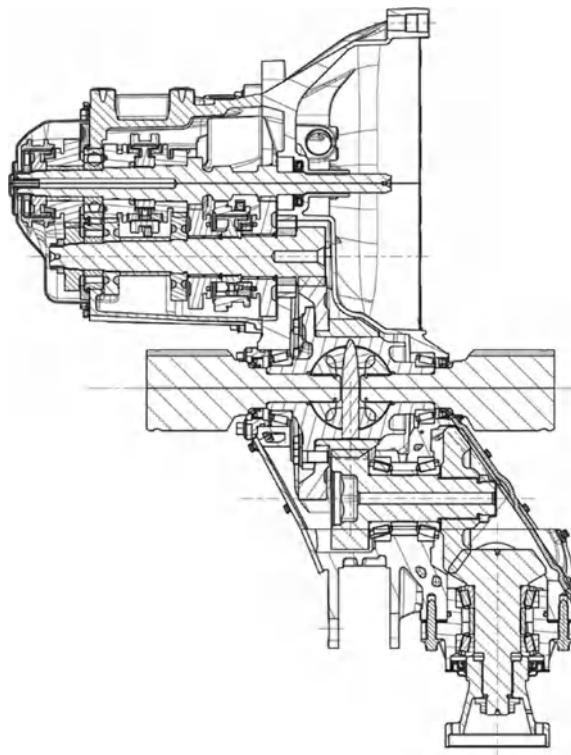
Gearbox, differential and transfer box of an all-wheels drive car with transversal front engine (courtesy of FIAT)
